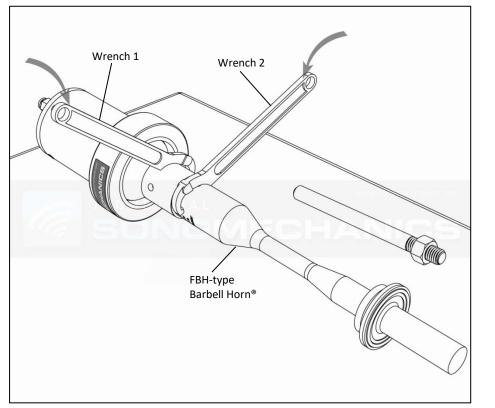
2. Attaching a Horn to the Transducer, Step 2.
